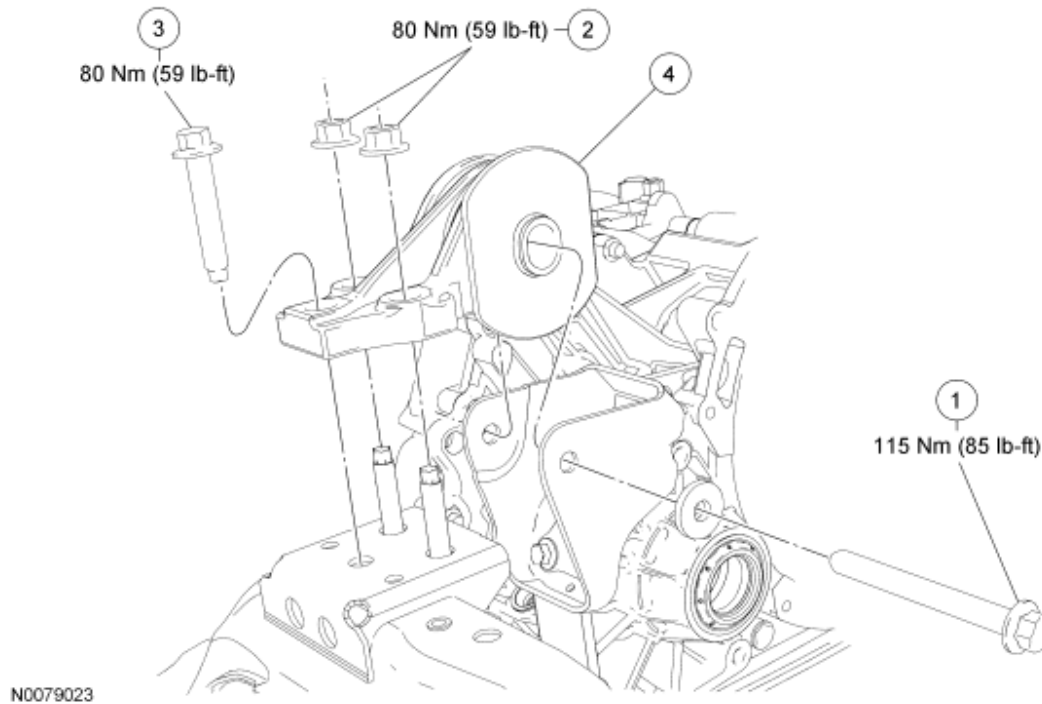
Transaxle Support Insulator Components - Lower, Rear, 3.0L DOHC With Torque Specifications
